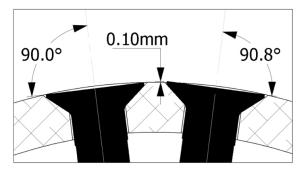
Fastener head protrusion caused by off-normal drilling and countersinking. Shown are 3/16" flat head fasteners on a curved panel with 45mm bend radius.
